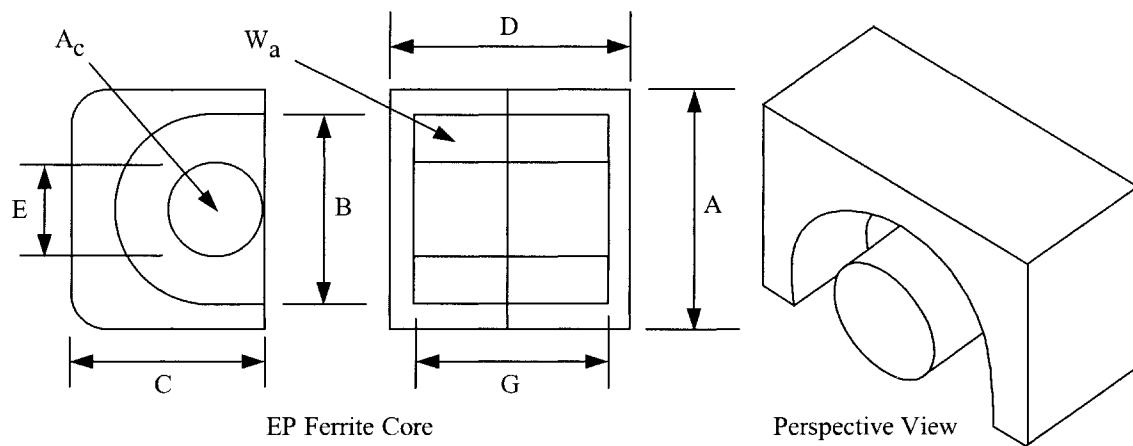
Dimension Outline for EP Ferrite Cores.
